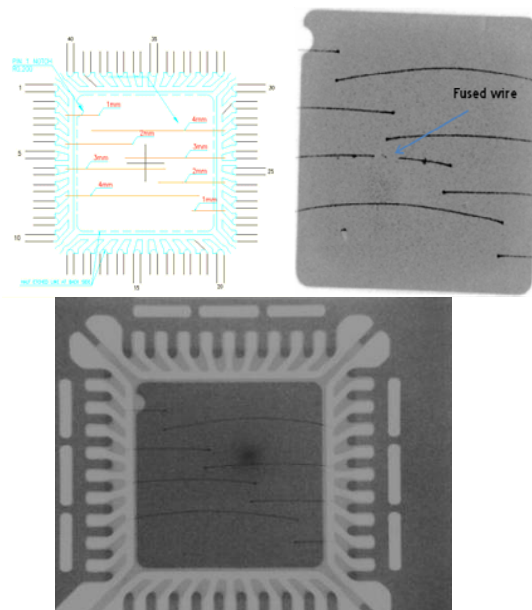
Bonding diagram for the QFN-mounted samples (top left), and X-ray picture after fusing test on 3mm long wire (top right). Tester QFN package with wires for measurement (bottom).
